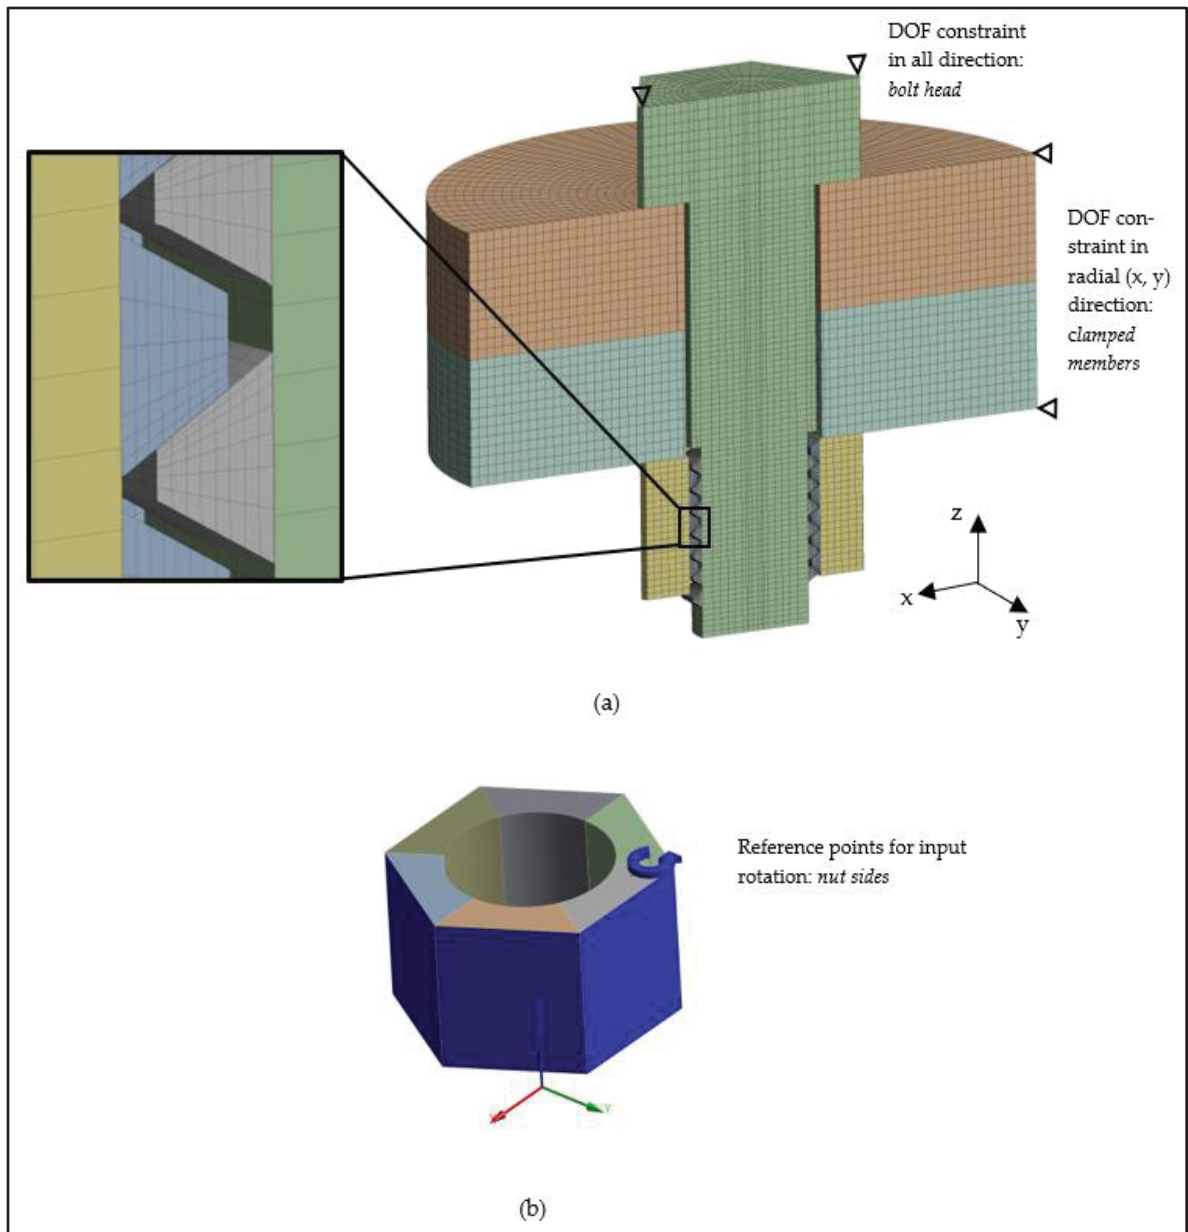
Three-dimensional FE model of bolted joint showing engaged thread elements: (a) complete model with constraints and thread mesh details; (b) nut rotation
